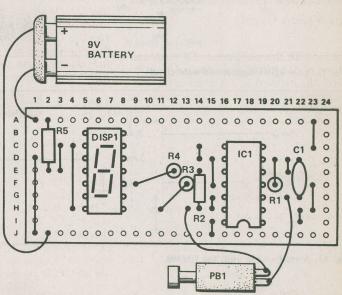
Veroboard layout of the project, showing component locations and track breaks underneath the board.
